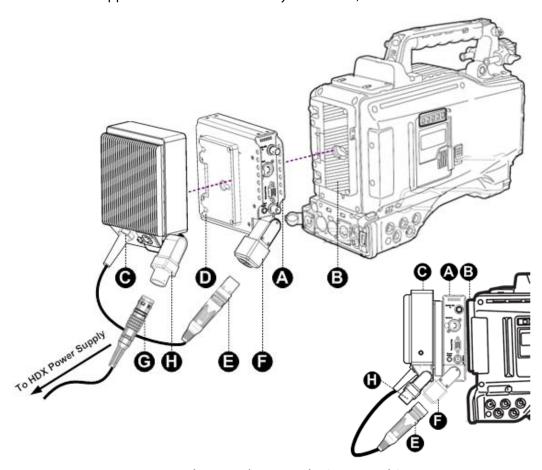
Mounting the PowerPlus Unit to the CopperHead Camera Unit
